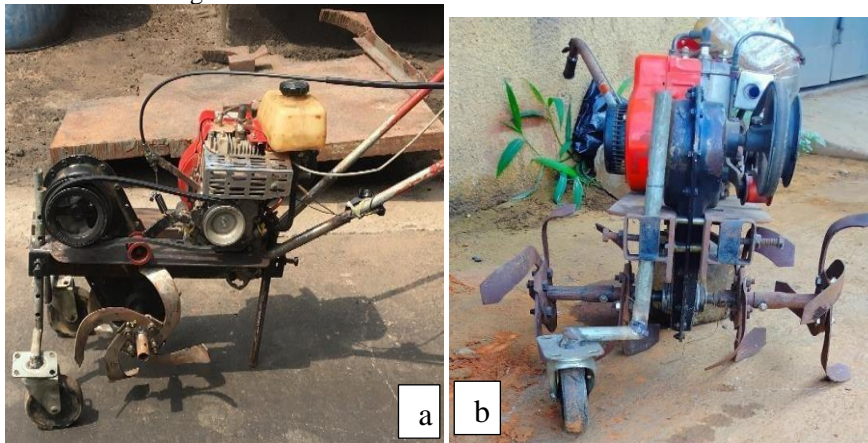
Assembled Fabricated Hand-pushed Weeder (a: 2 sets and b: 4 sets of blades)
